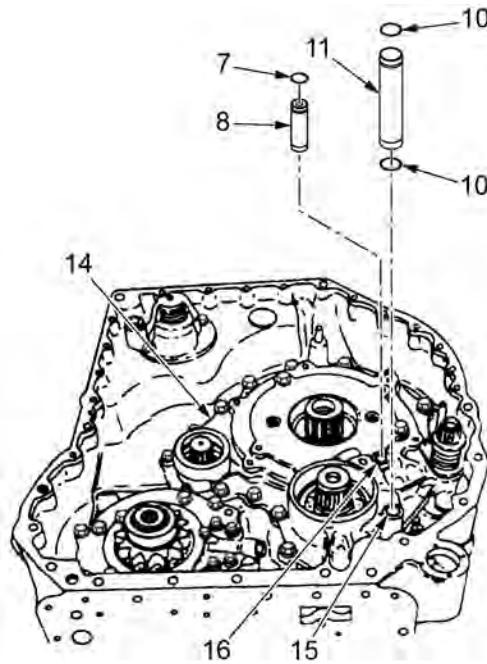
Brake Apply Tube, Brake Coolant Tube, and Packings Installation.
